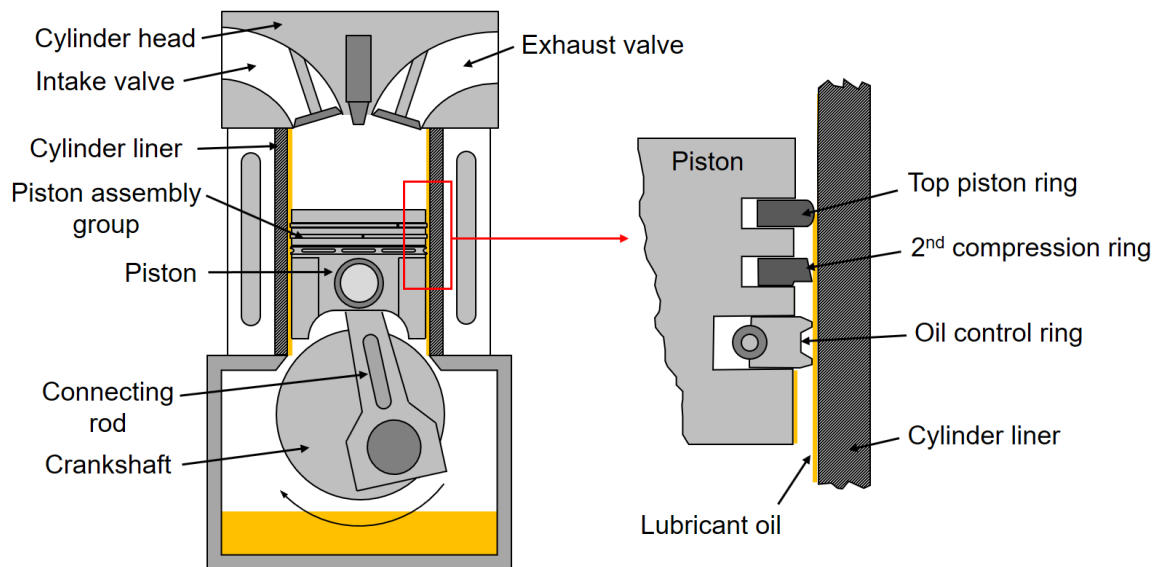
Schematic overview of the basic components of the common four-stroke engine (left) and the piston assembly group (right). Based on [18].
